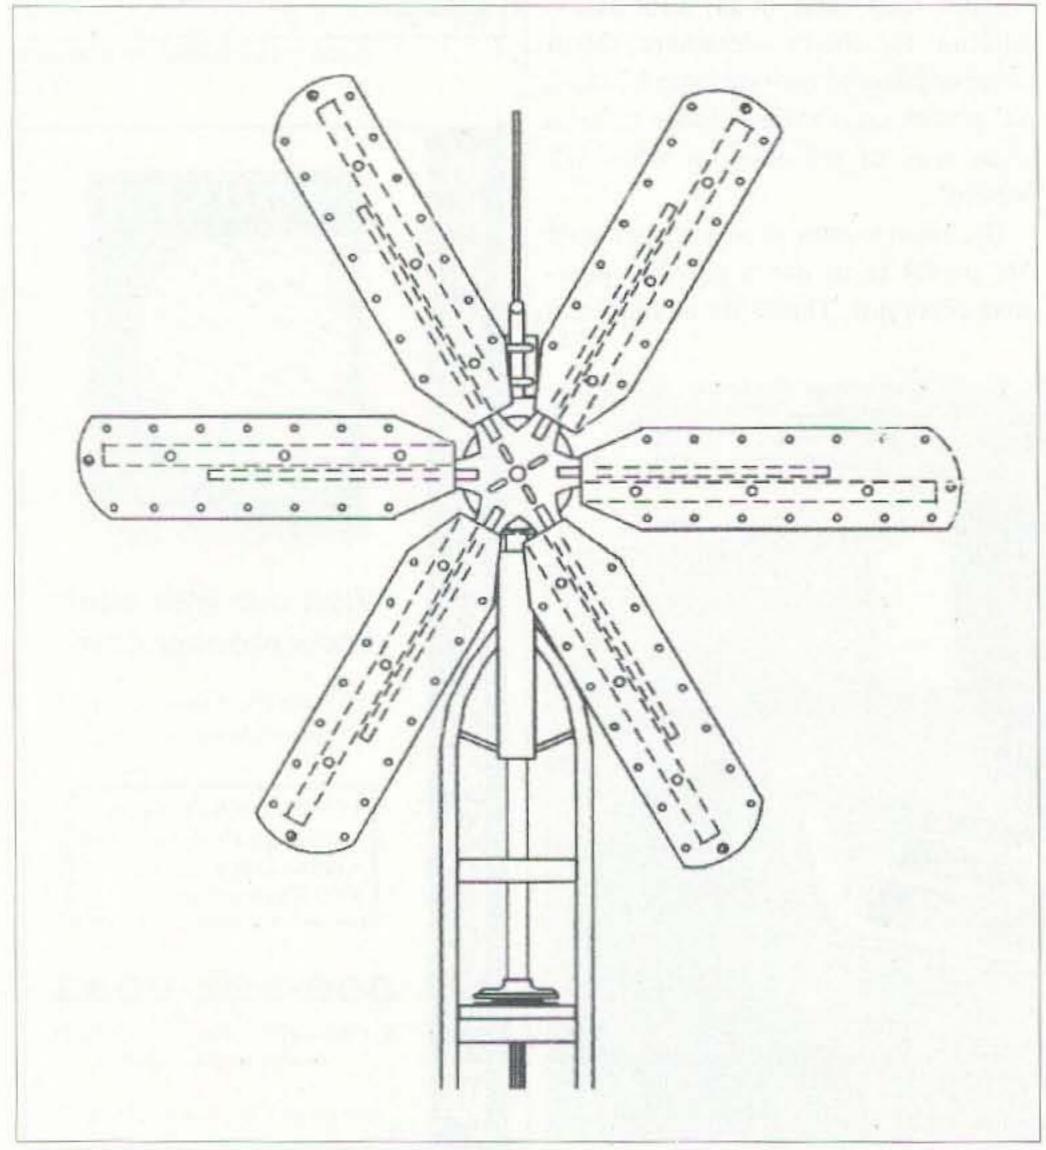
Front view of the experimental wind generator with blades assembled and installed.
